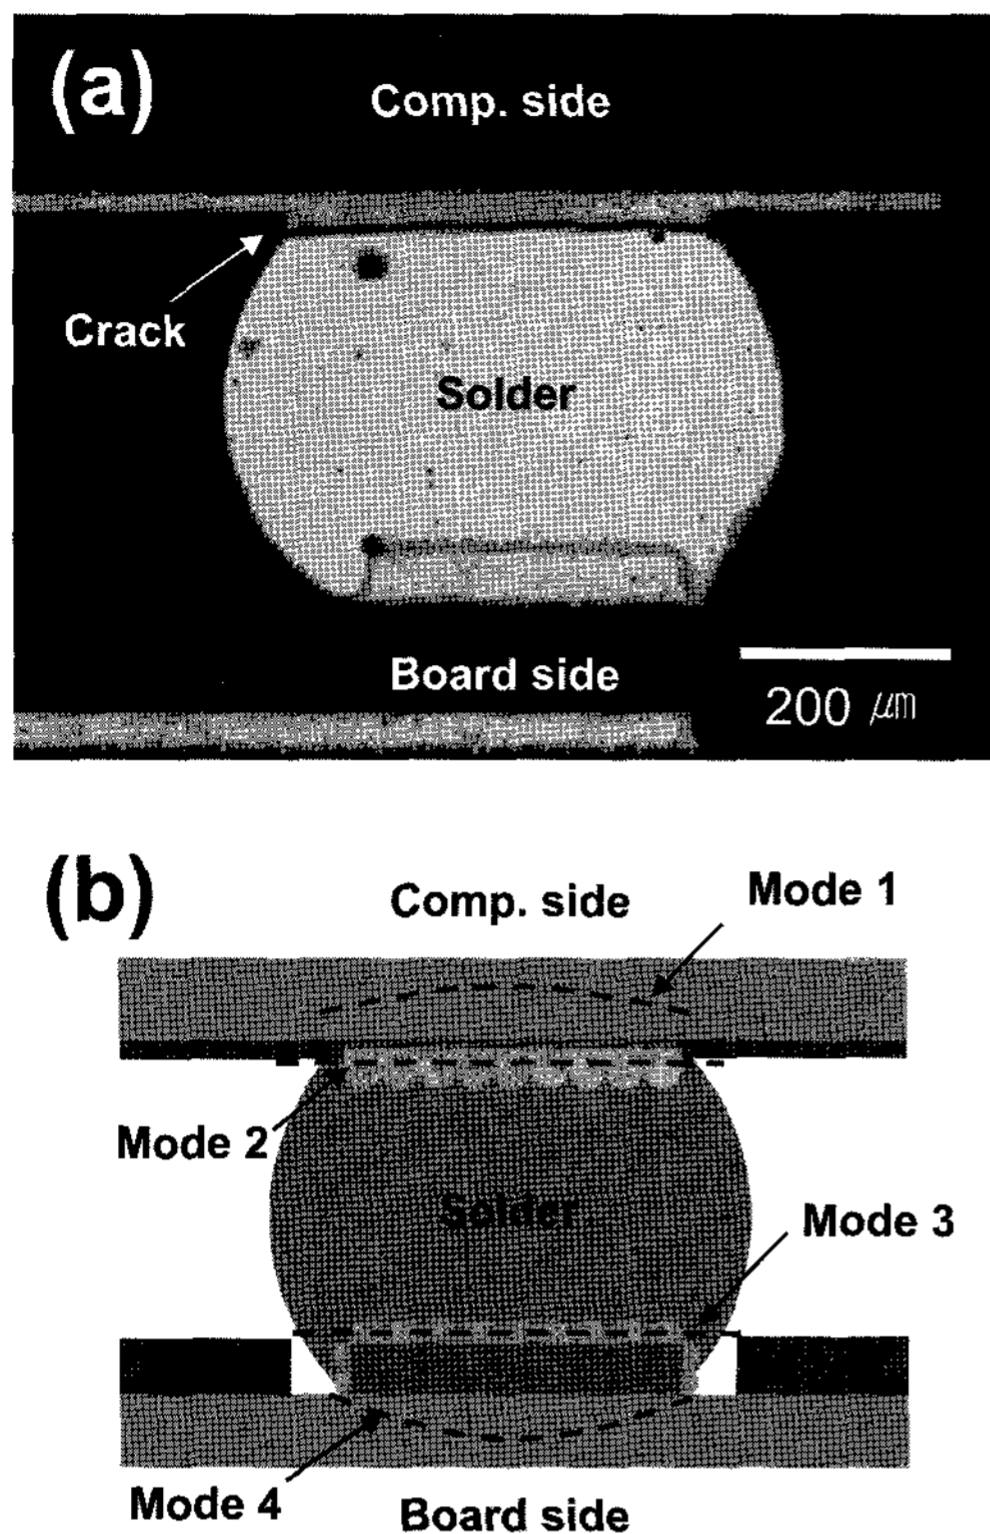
(a) The optical microscope image for solder joint crack and (b) schematic diagram of the solder joint crack mode.
